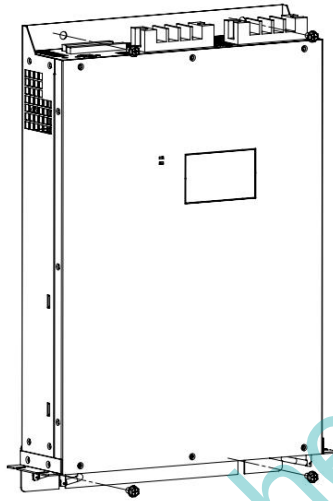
Mounting Hole Diagram for Wall-Mounted ASVG-LN
